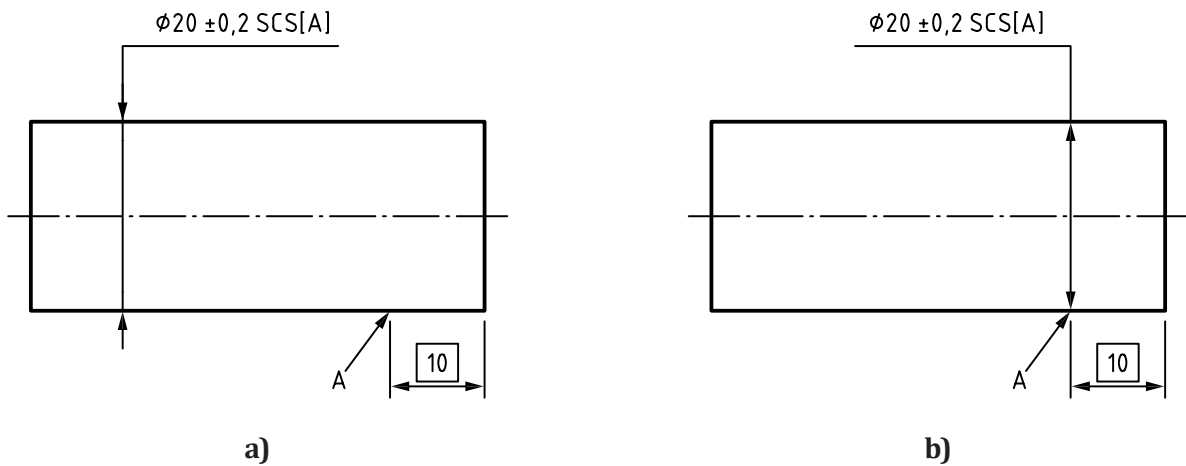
Examples of indications for a specific cross-section of the complete feature of linear size
